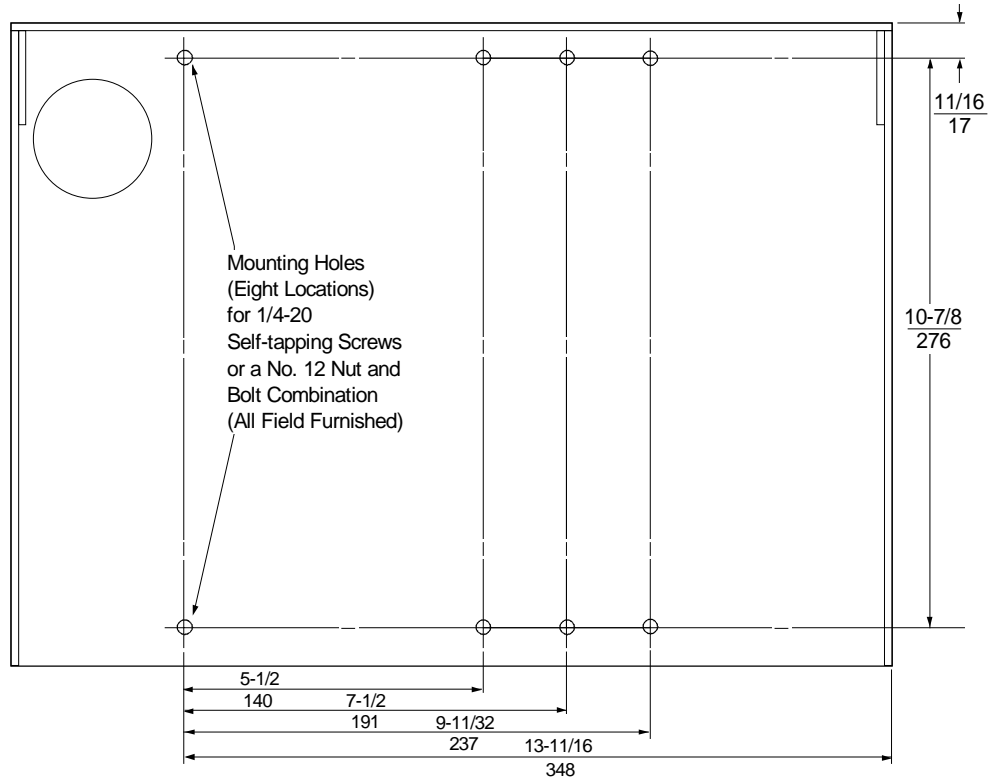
DryFlow A-4400 Series Refrigerated Air Dryer Base Mounting Hole Patterns (Plan View)
